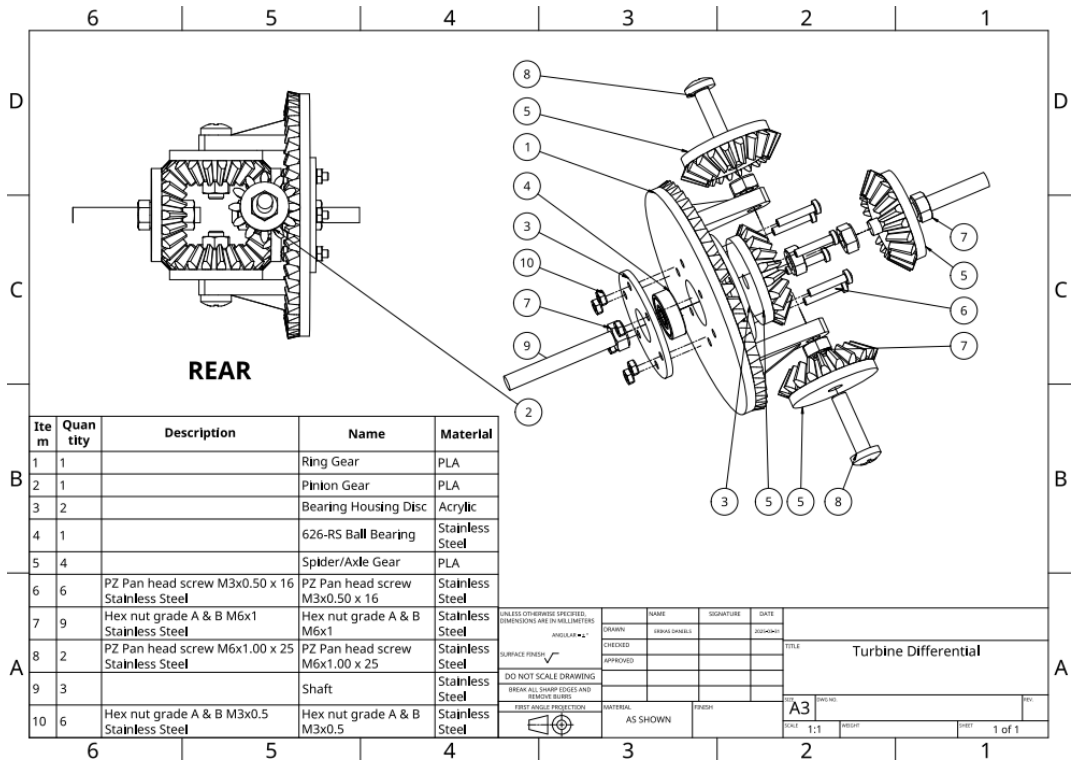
Differential Assembly - Exploded View with BOM
